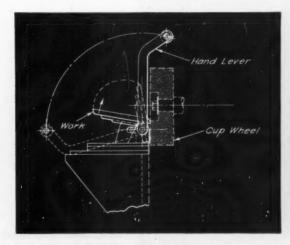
Grinding fixture for producing a radius on the heel of flatirons
